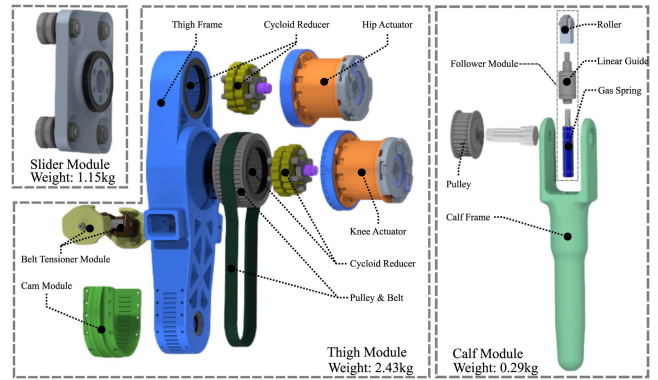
The exploded view of the integrated thigh structure mechanics and actuation components.
